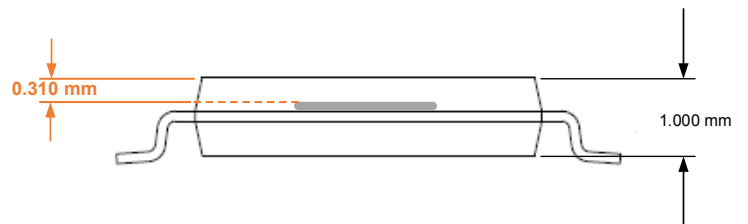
XtremeSense TMR Current Sensor Location in z Dimension for CT453 in TSSOP-8 Package
